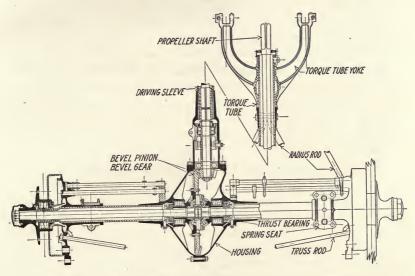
G.M.C. Delivery Car Bevel Gear Type Rear Axle.
